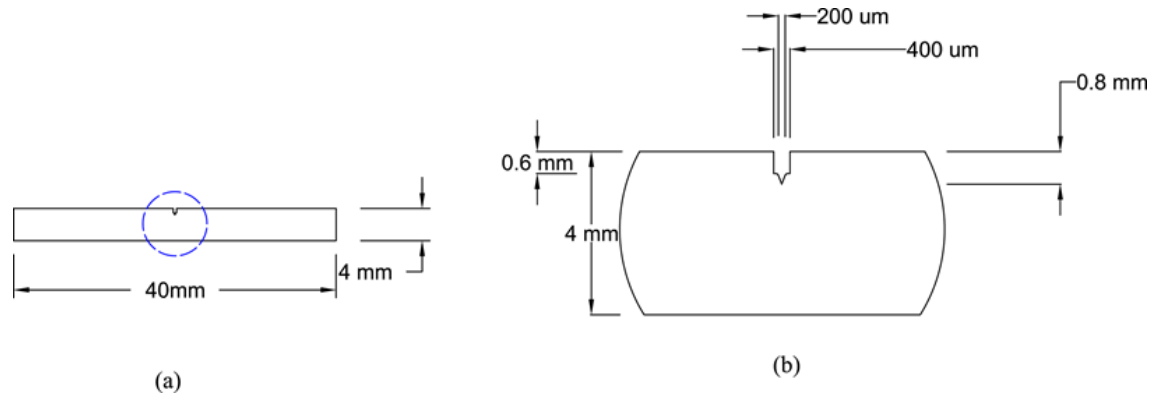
Notch geometry on a 30 mm span bend beam specimen (a) Overall view and (b) Expanded view of the notch in (a).
